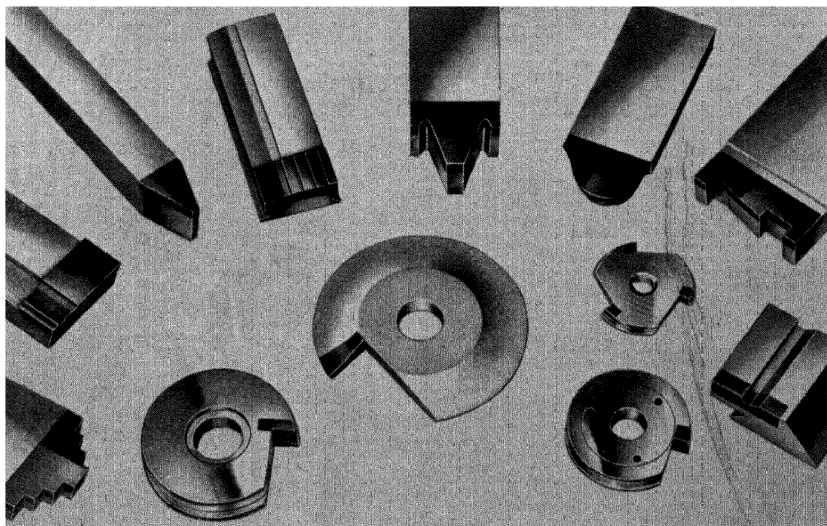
Assortment of special-shaped hard metal form tools. They include flat, dovetail, and circular forms and tools for skiving, threading, radius forming, pulley grooving, and overshot and undershot cutters. (Courtesy of Carboloy Co., Inc.)
